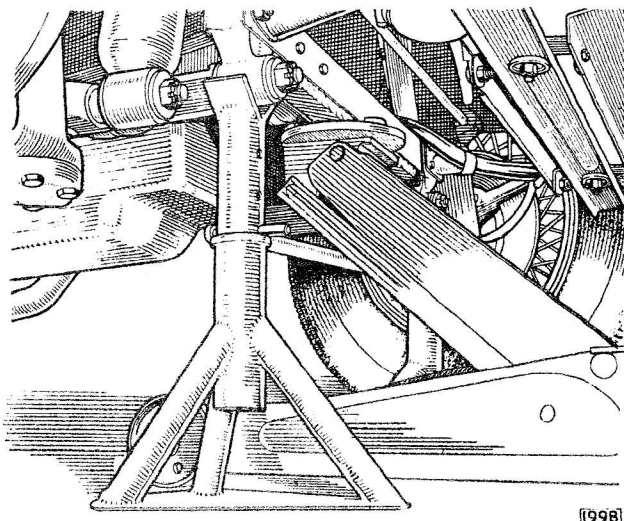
Showing the front of the car jacked up under the front cross member; note the piece of hardwood which must first be inserted in the member. If only one front wheel is to be raised, the jack can be placed at the front end of the lower wishbone fulcrum shaft at the point where the stand is in position.
